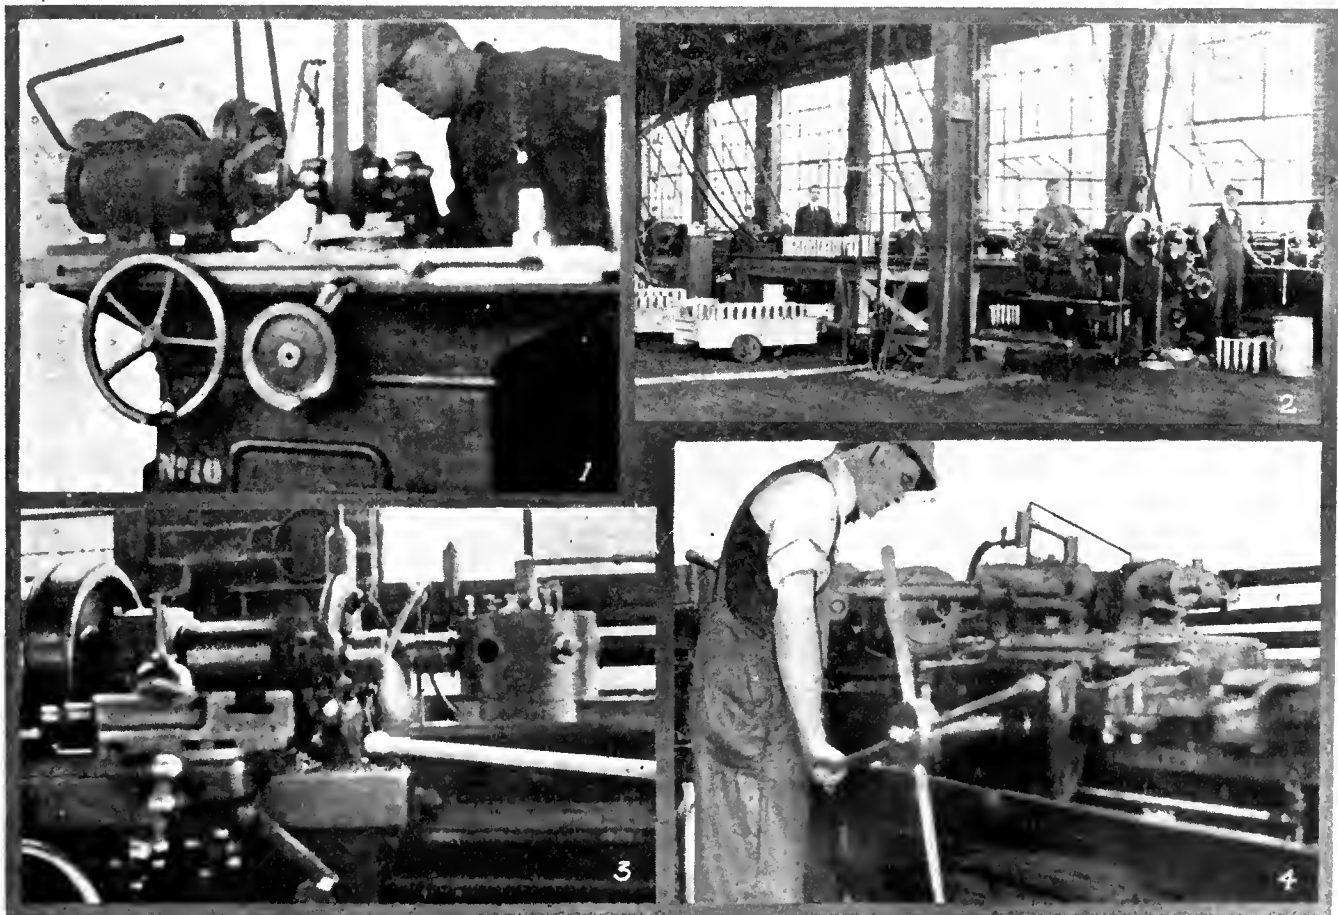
UNIVERSAL GRINDER CONVERTED INTO THREAD MILLING MACHINE. (2) GENERAL VIEW OF MACHINE SHOP SHOWING SHELL LATHES. (3) LONDON MACHINE TOOL CO. LATHE RECESSING SHELL BASE. (4) JONES & LAMSON TURRET LATHE FINISHING INSIDE OF SHELL.
